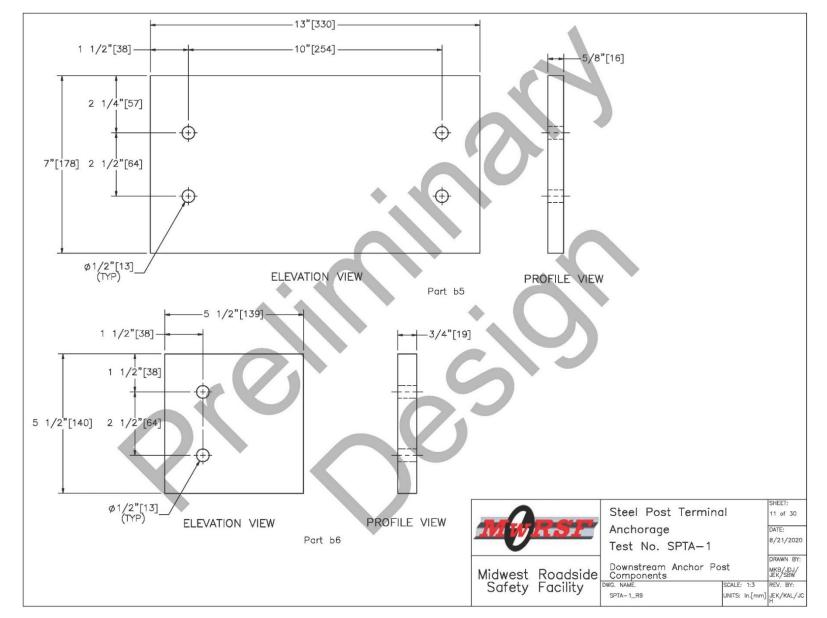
Downstream Anchor Post Components, Test No. SPTA-1
